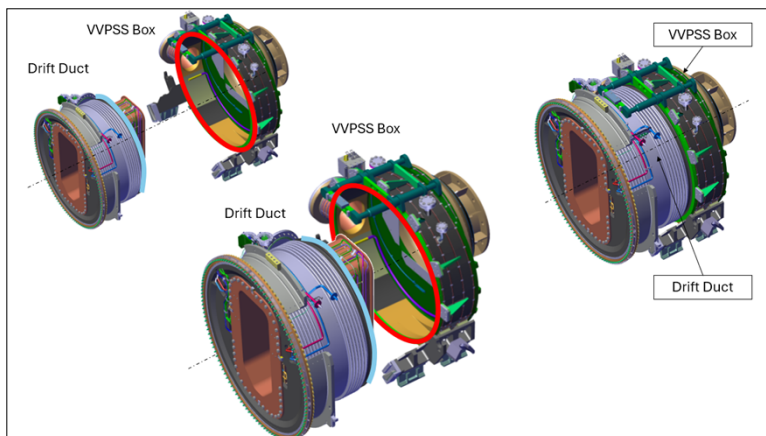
Batch VVPSS Box Welded to the Drift Duct
